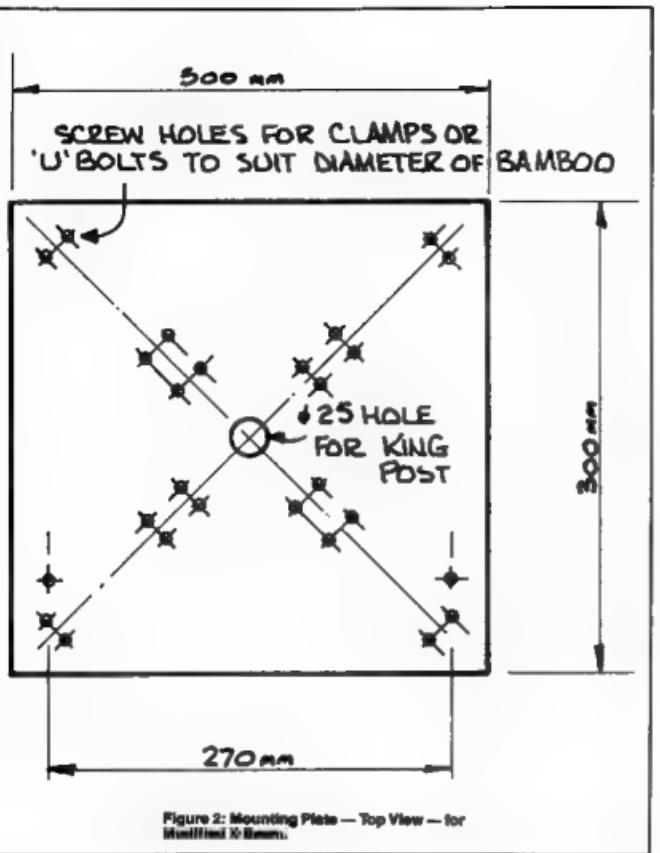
Mounting Plate — Top View — for Modified X-Beams.
